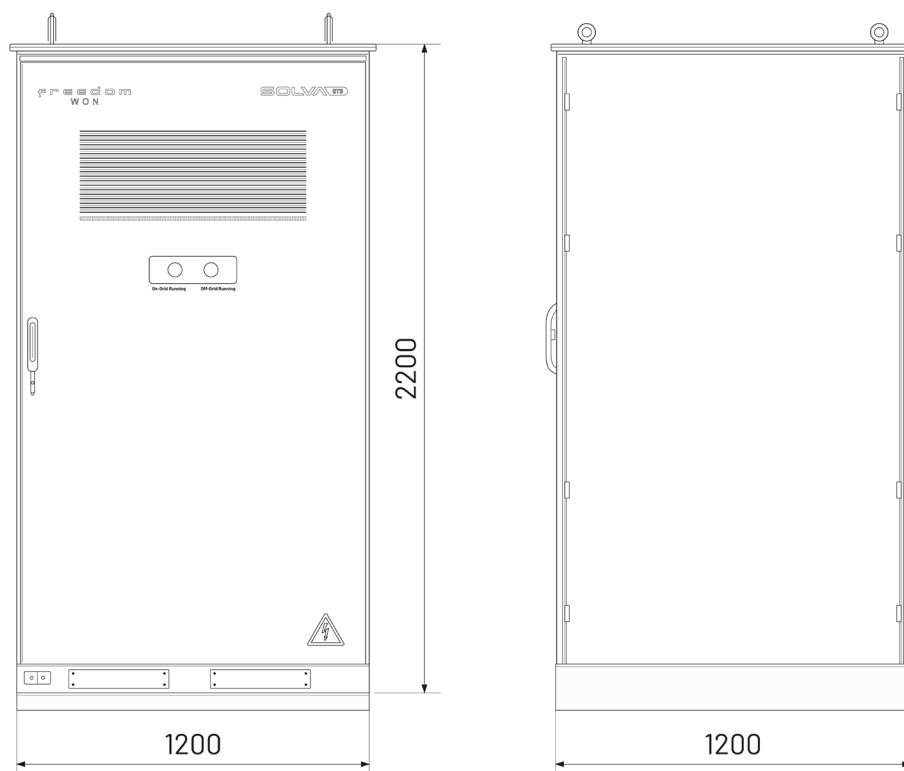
Dimensions of the SOLVA STS 6IN cabinet
